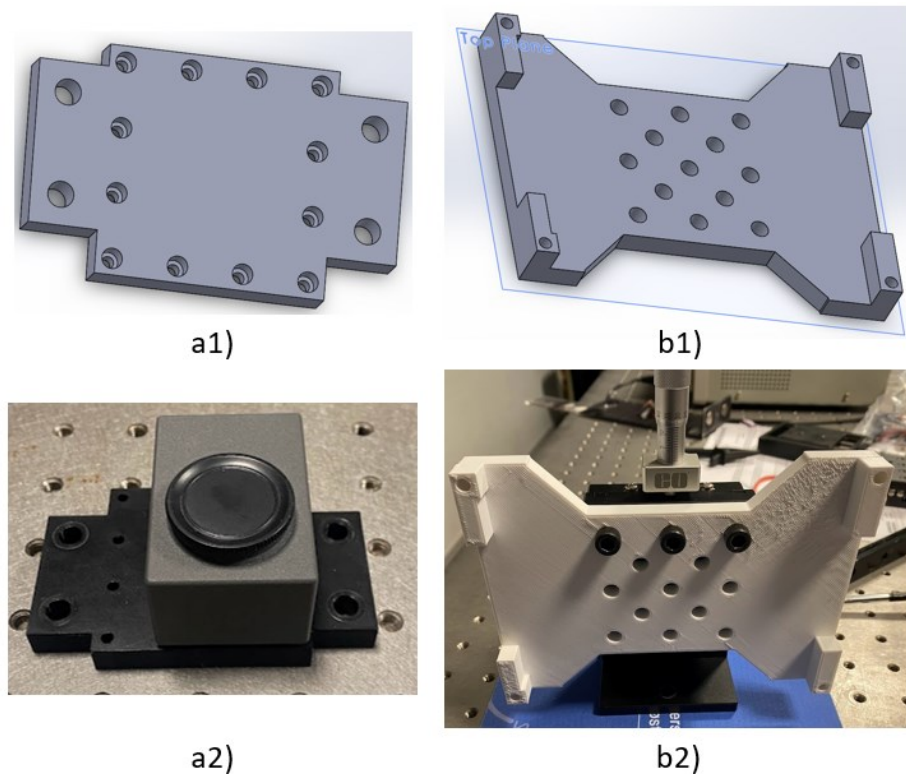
a1)-b1) camera holder and PCB holder design by Solidworks. a2) Camera is mounted on holder. b2) PCB holder is mounted on moving stage.
